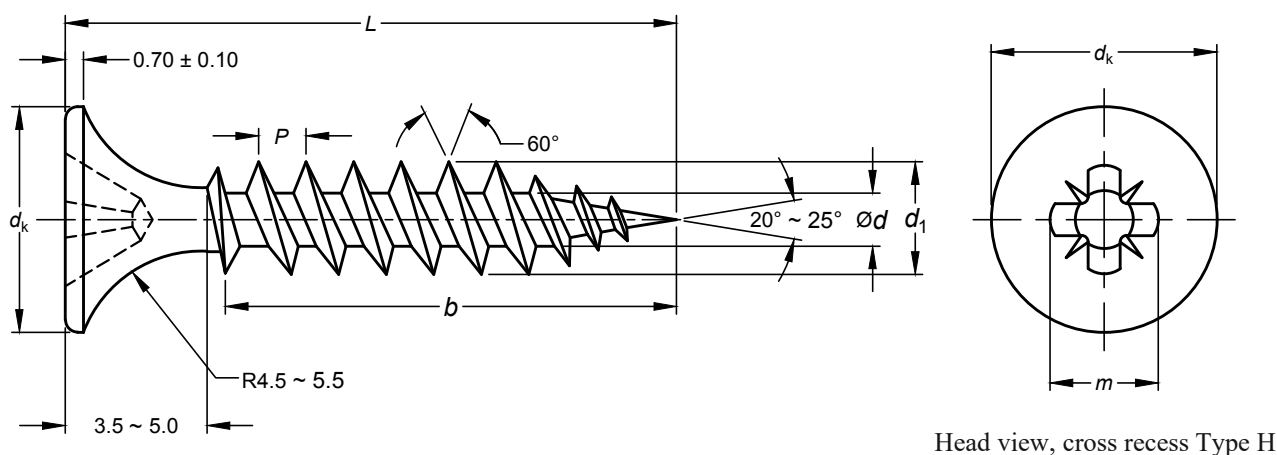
TRUMPET HEAD DRYWALL SCREW WITH POINTED END
